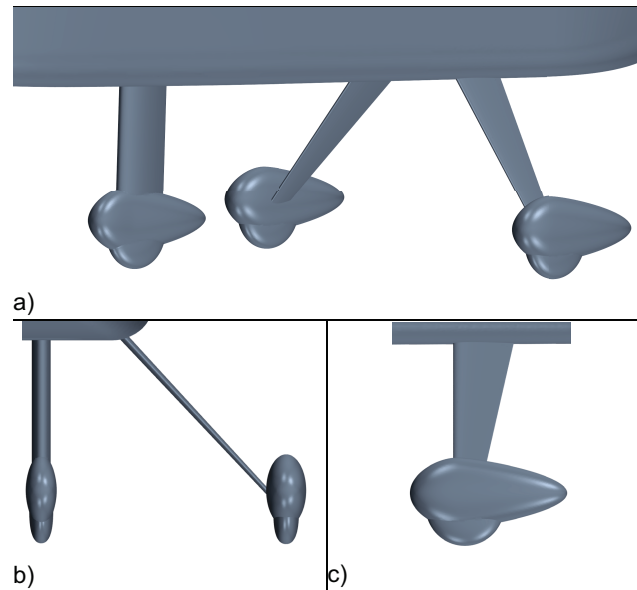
Fixed-faired landing gear configuration a) isometric view, b) front view, c) side view of main landing gear
